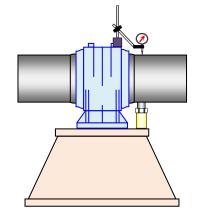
Arrangement for jack-up test with hydraulic jack and mechanical dial gauge.
